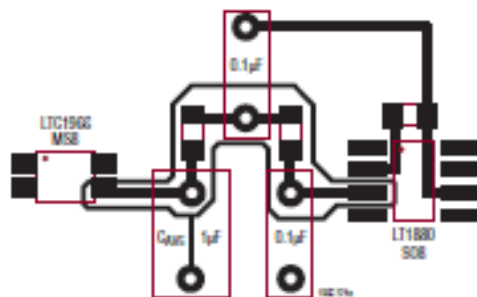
PCB Layout of Figure 13 with Guard Ring
